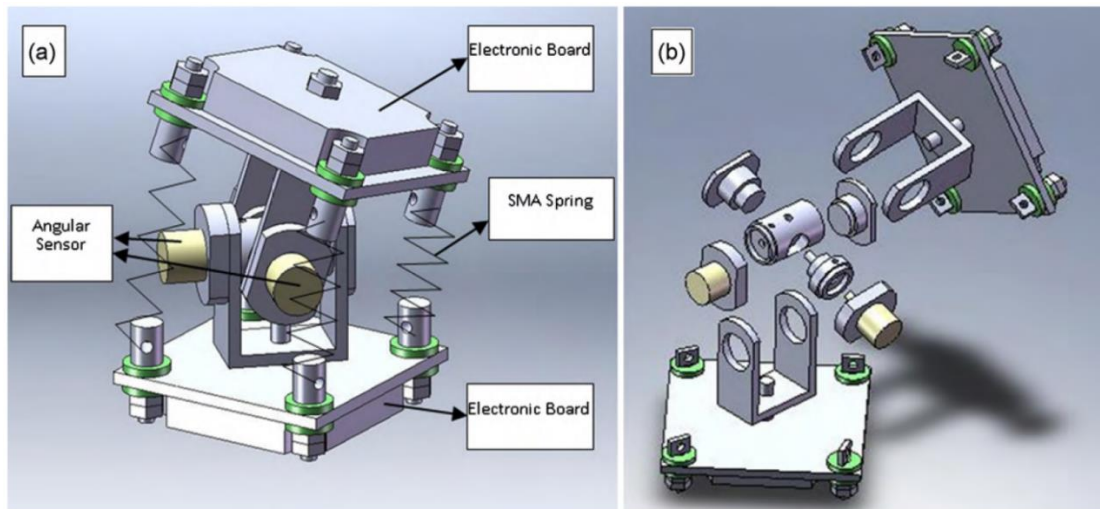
Schematic view of the FlexiBot (a) assembly design and (b) exploded view [91].
